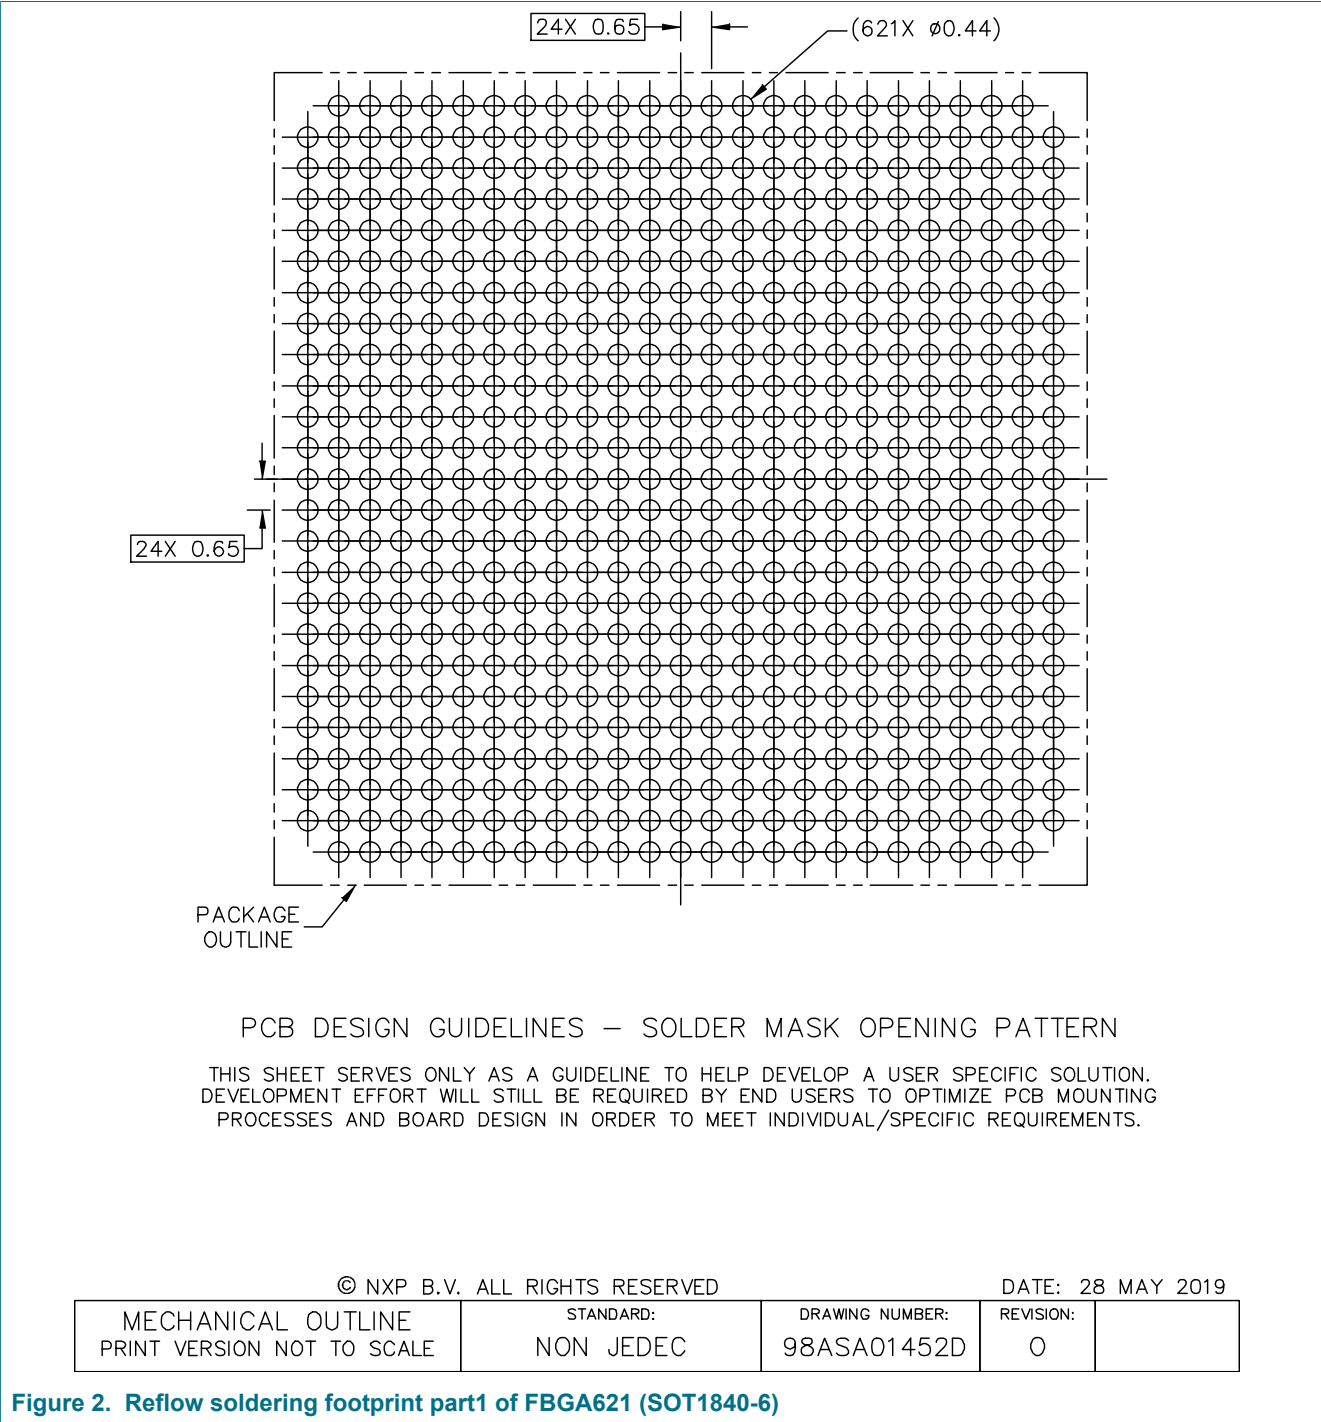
Reflow soldering footprint part1 of FBGA621 (SOT1840-6)
